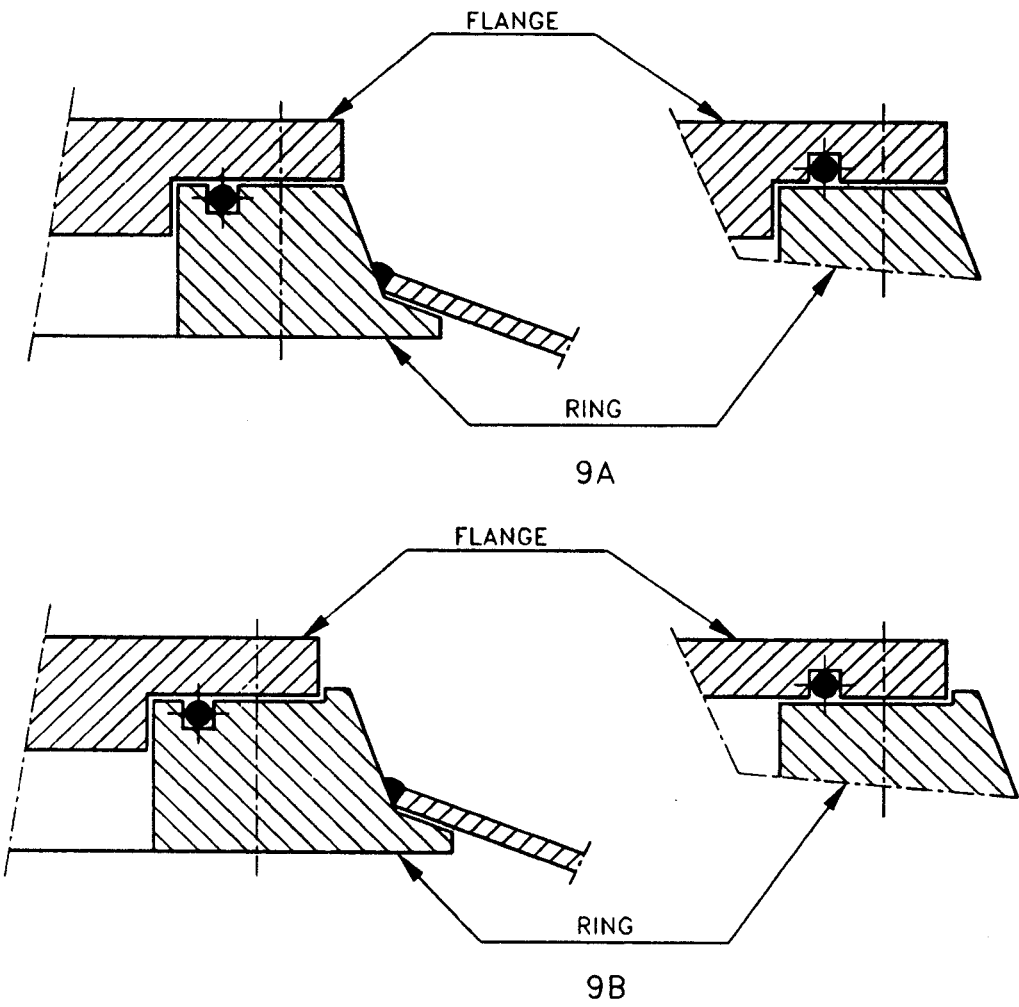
EXAMPLES OF WELDED RINGS WITH FLANGES
